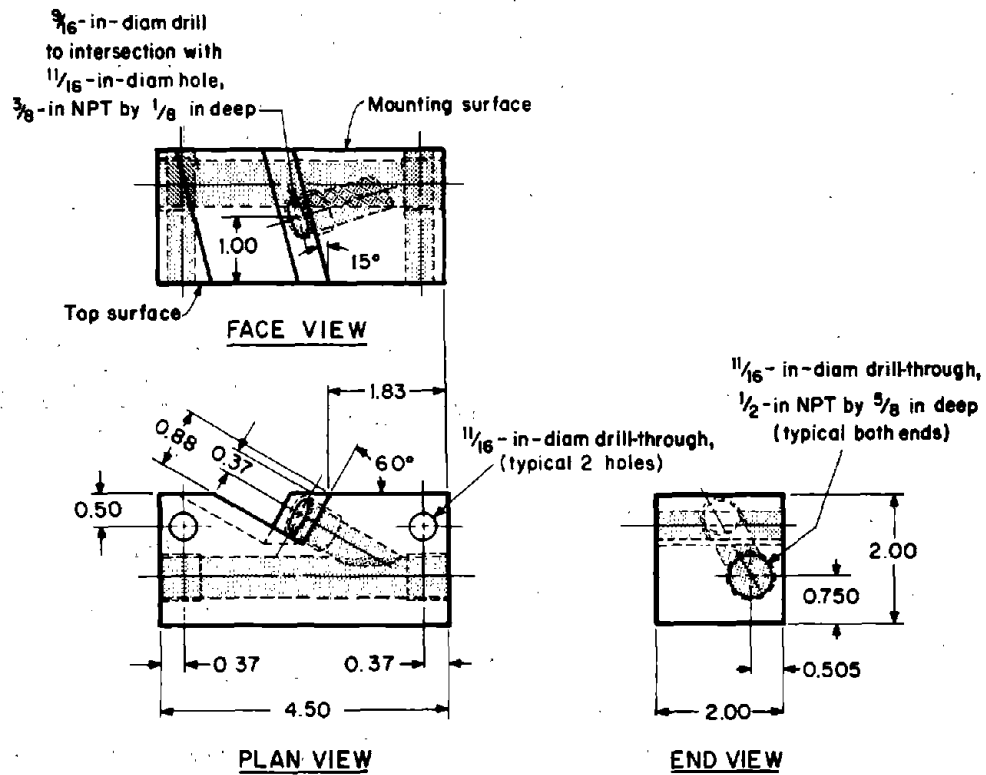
Water spray manifold 2. All dimensions are in inches.
